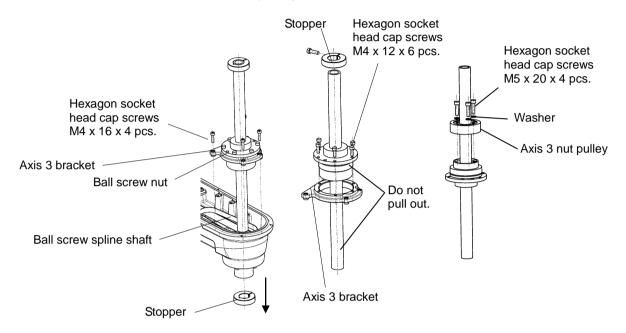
Dismounting ball screw spline unit (KHL-500, KHL-600, KHL-700)
